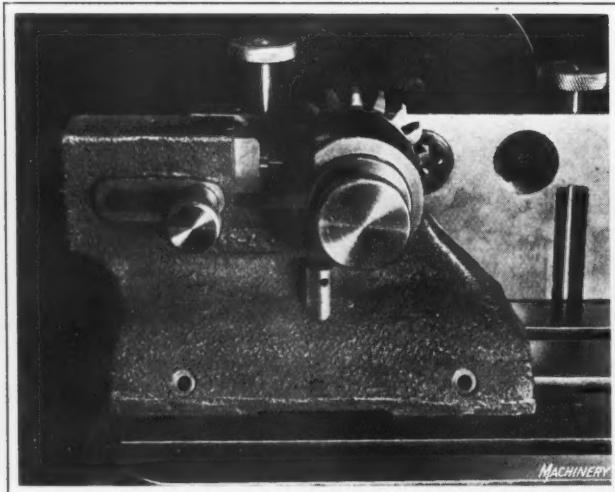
Front View of Fixture used for projecting Spur Gears or Gear Shaper Cutters
